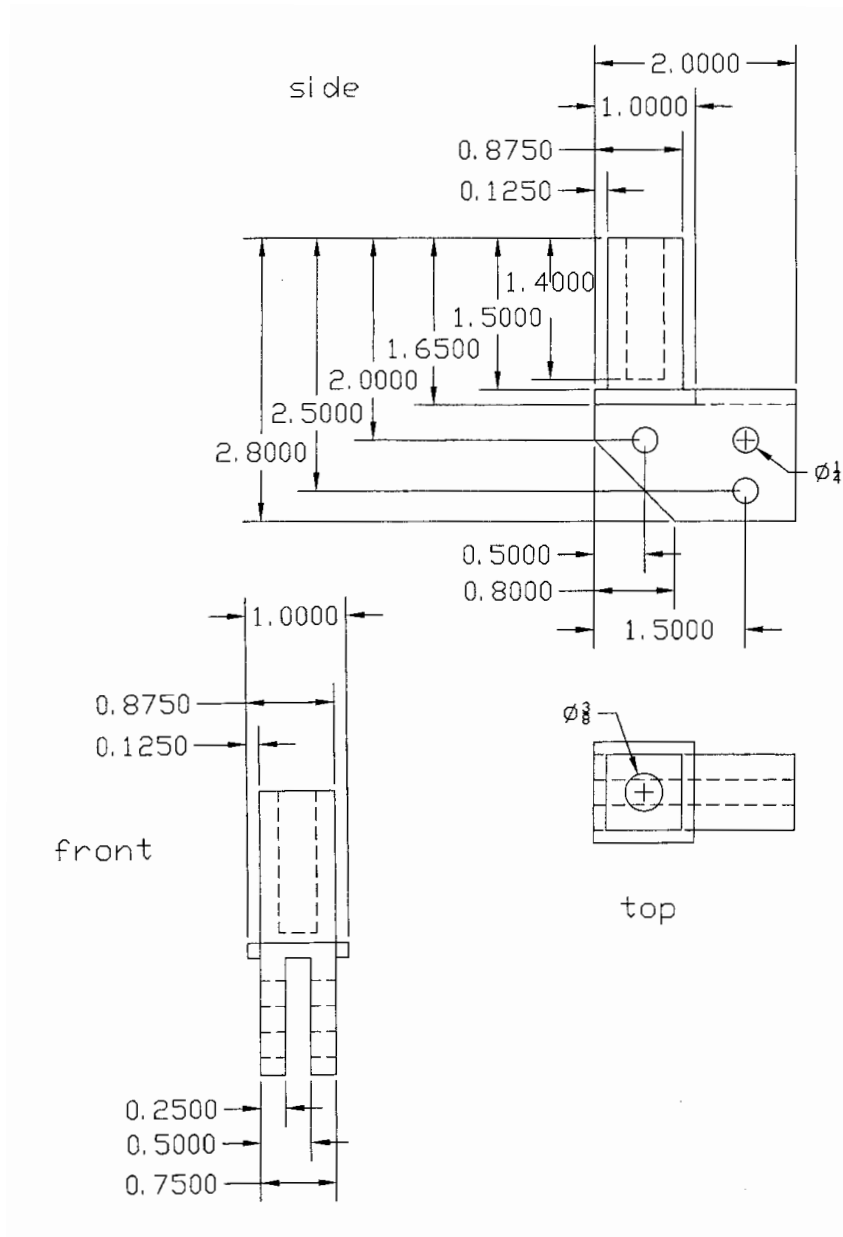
CAD details of the foot holders. They are machined from aluminum block.
